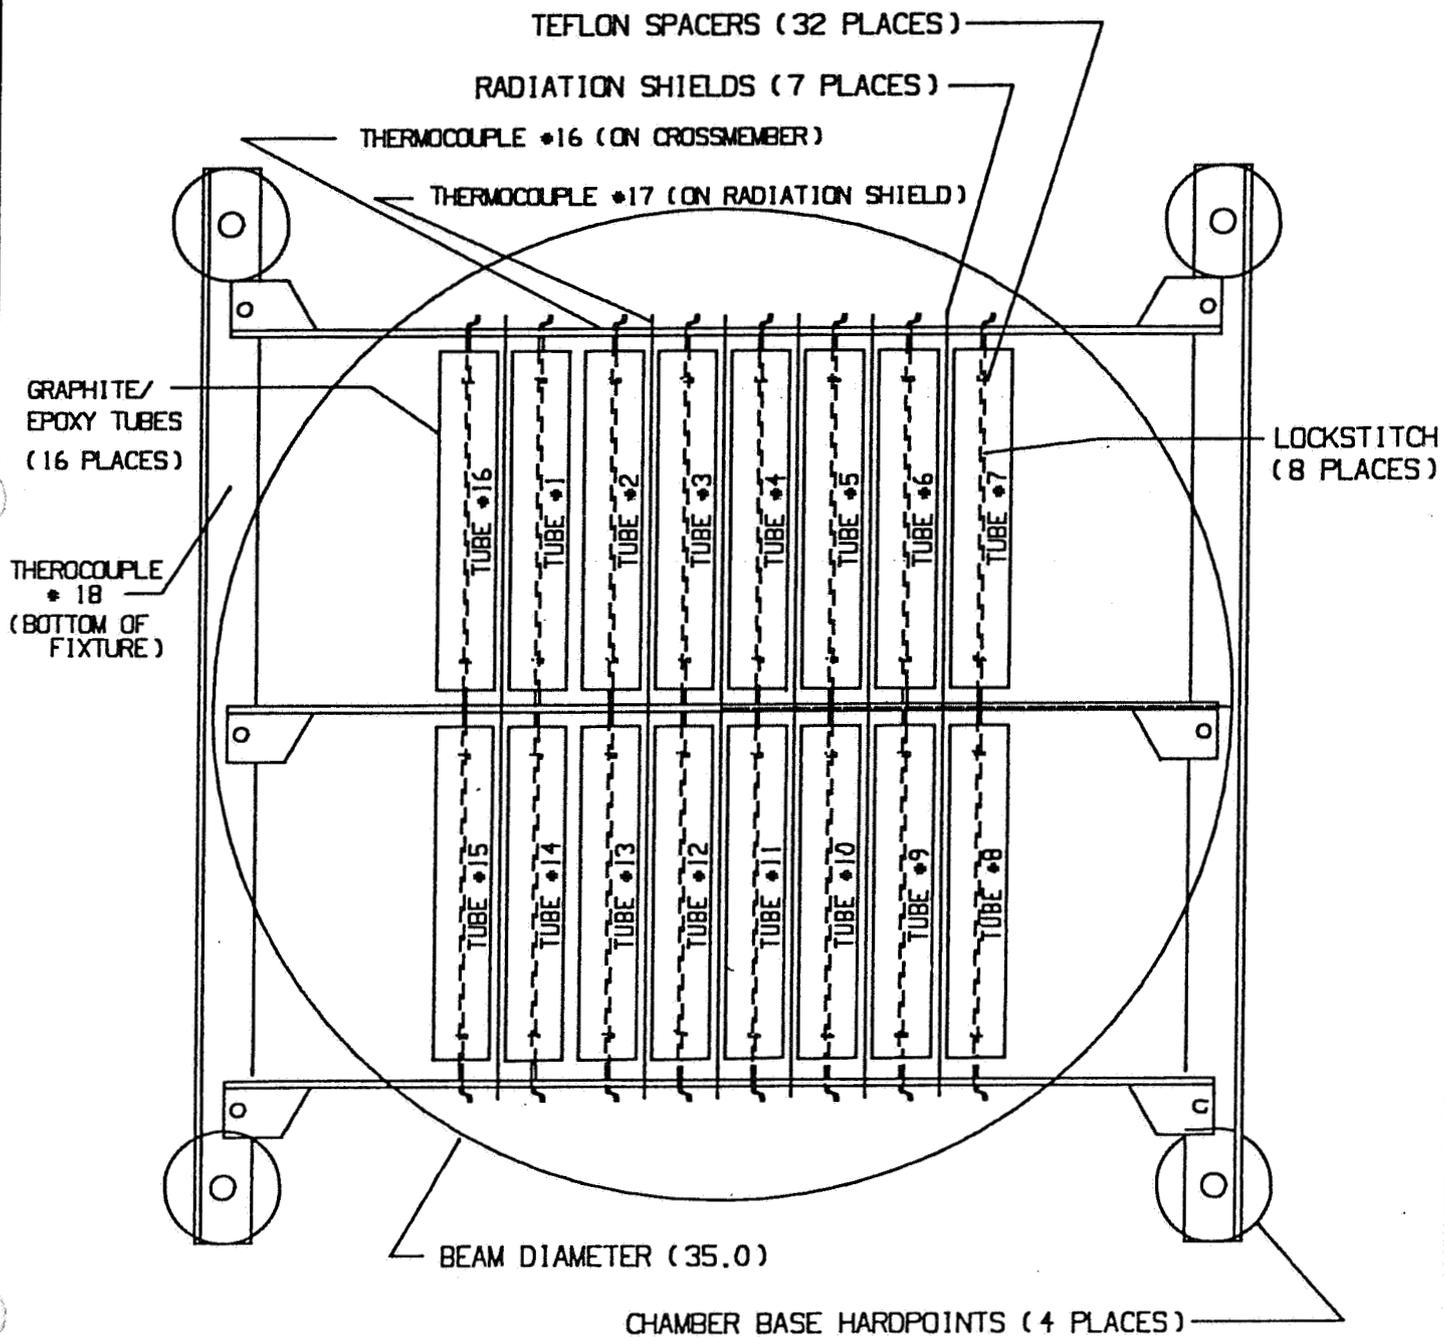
Gr/Ep Tube Thermal/Vacuum Test Fixture
